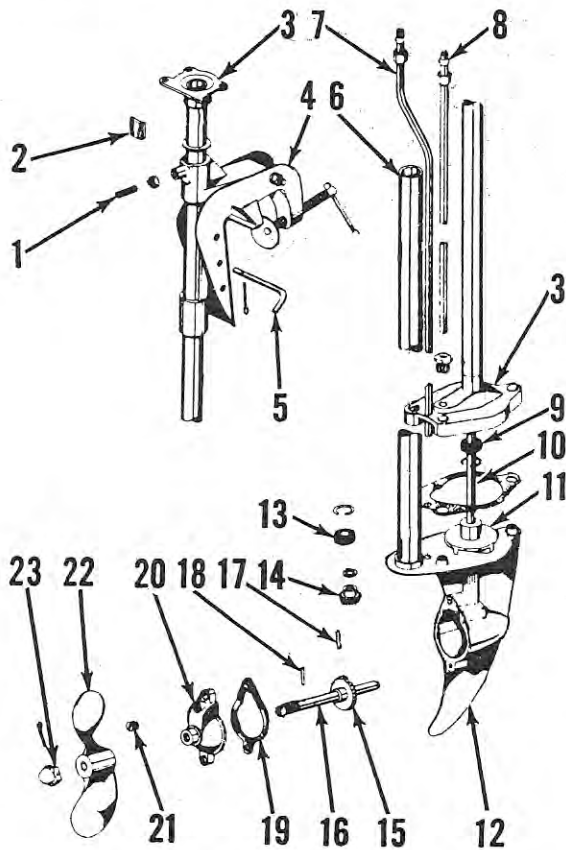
Exploded view of Neptune lower unit, gear case and associated parts.
